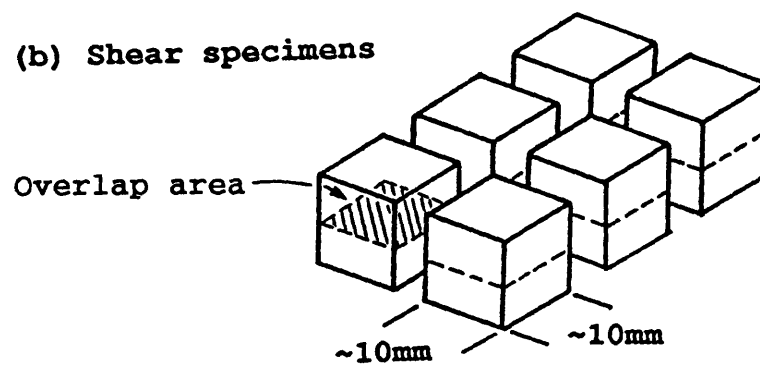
Preparation and testing geometry of lap-shear specimens.
